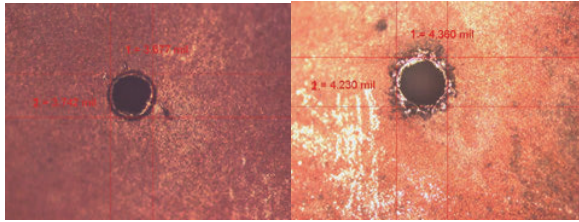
Holes by laser ablation 6+2+2mj (left); 10+2+2mj (right)
